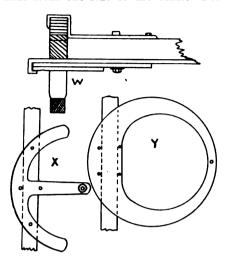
DETAILS OF FIFTH WHEEL CONSTRUCTION
